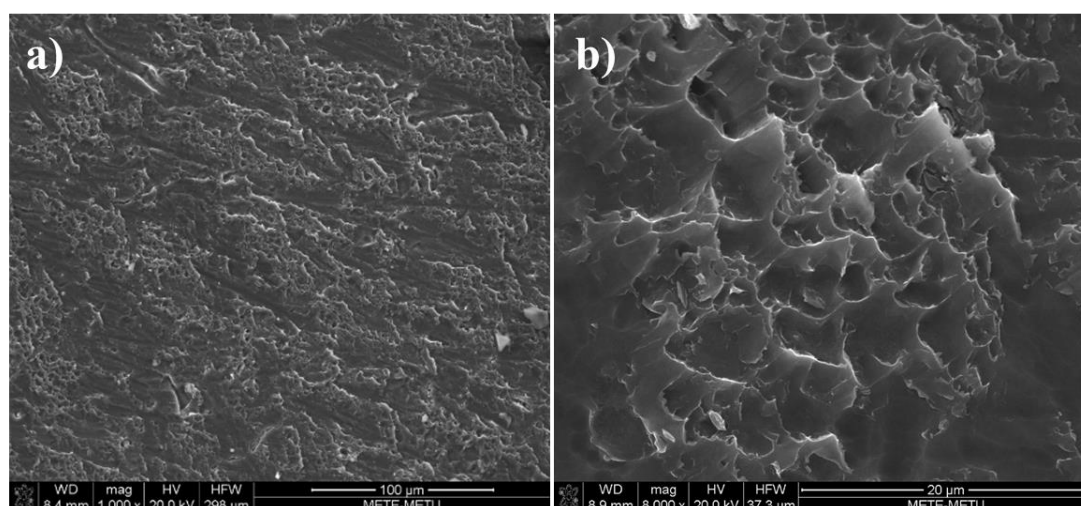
24. Fracture surface of the diffusion bonded cast Al6063 alloy.
